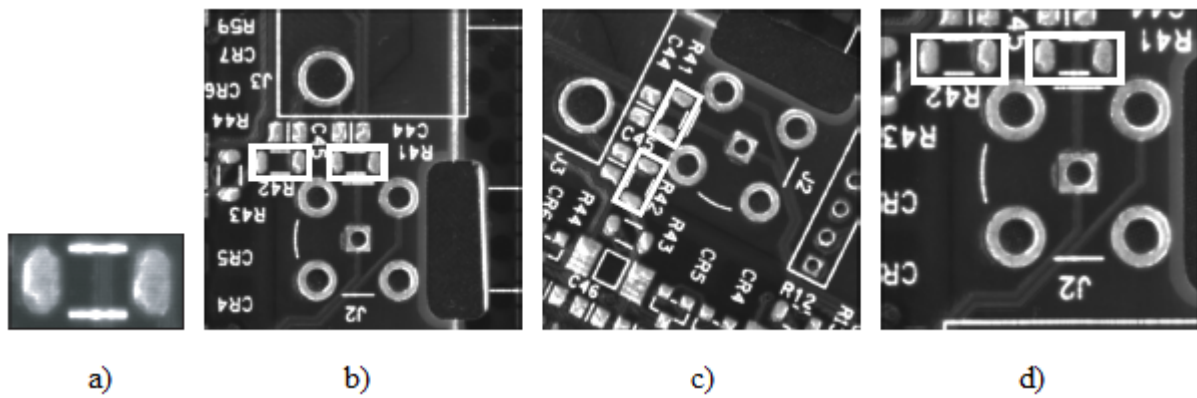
Pattern Matching (PM) a) Template b) Inspection Image c) Rotation d) Scaling
